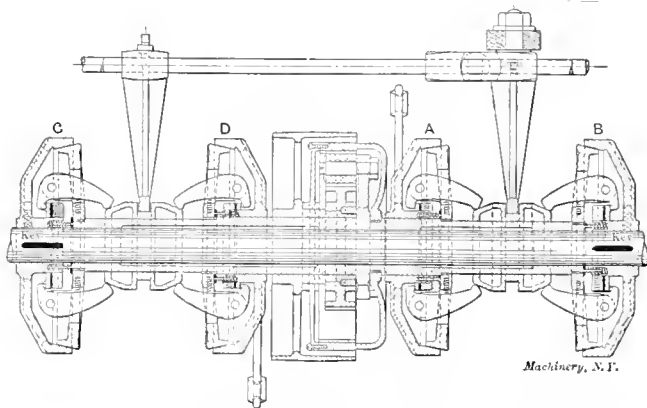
Section through Smith One-belt Reversible Counter-shaft.
